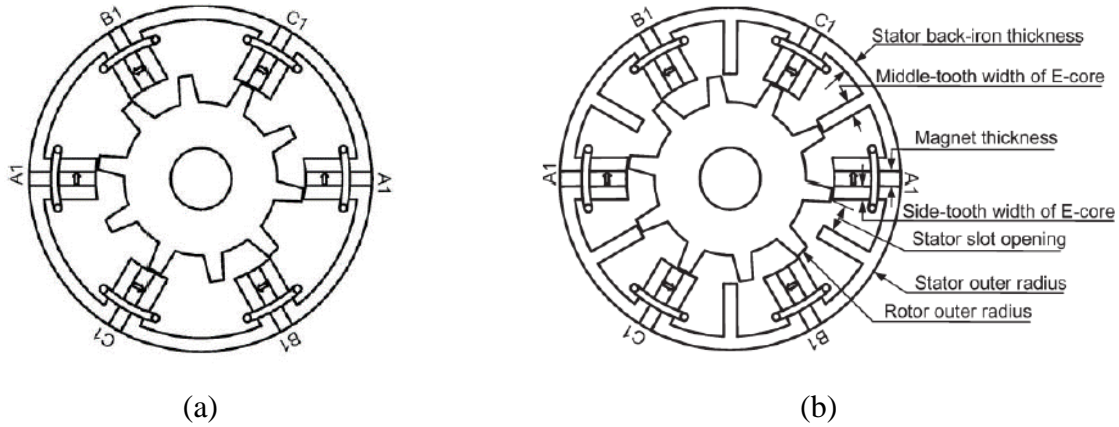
(a) C-core FSPM machine (b) E-core FSPM machine [57]
